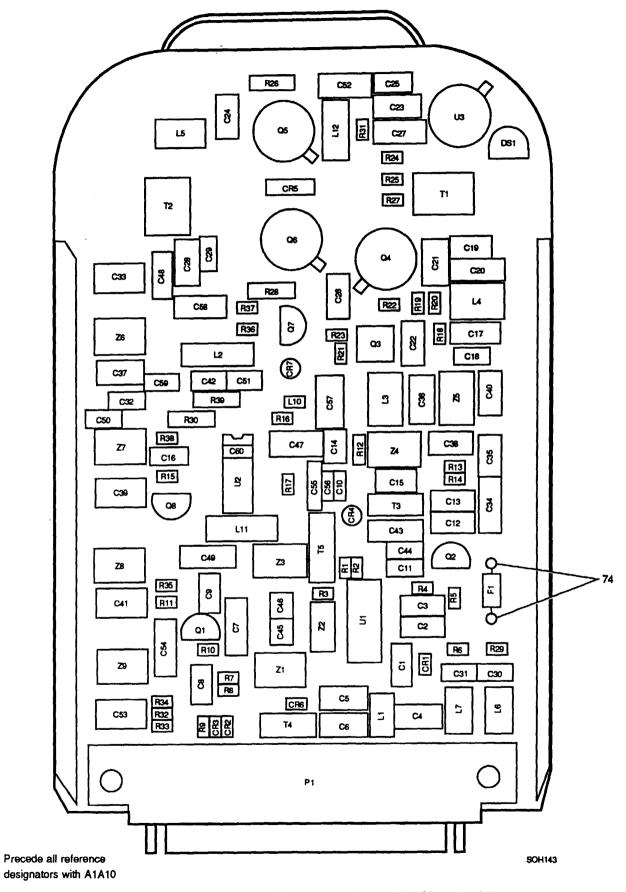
A10 Mixer Board Assembly (Sheet 1 of 2)
